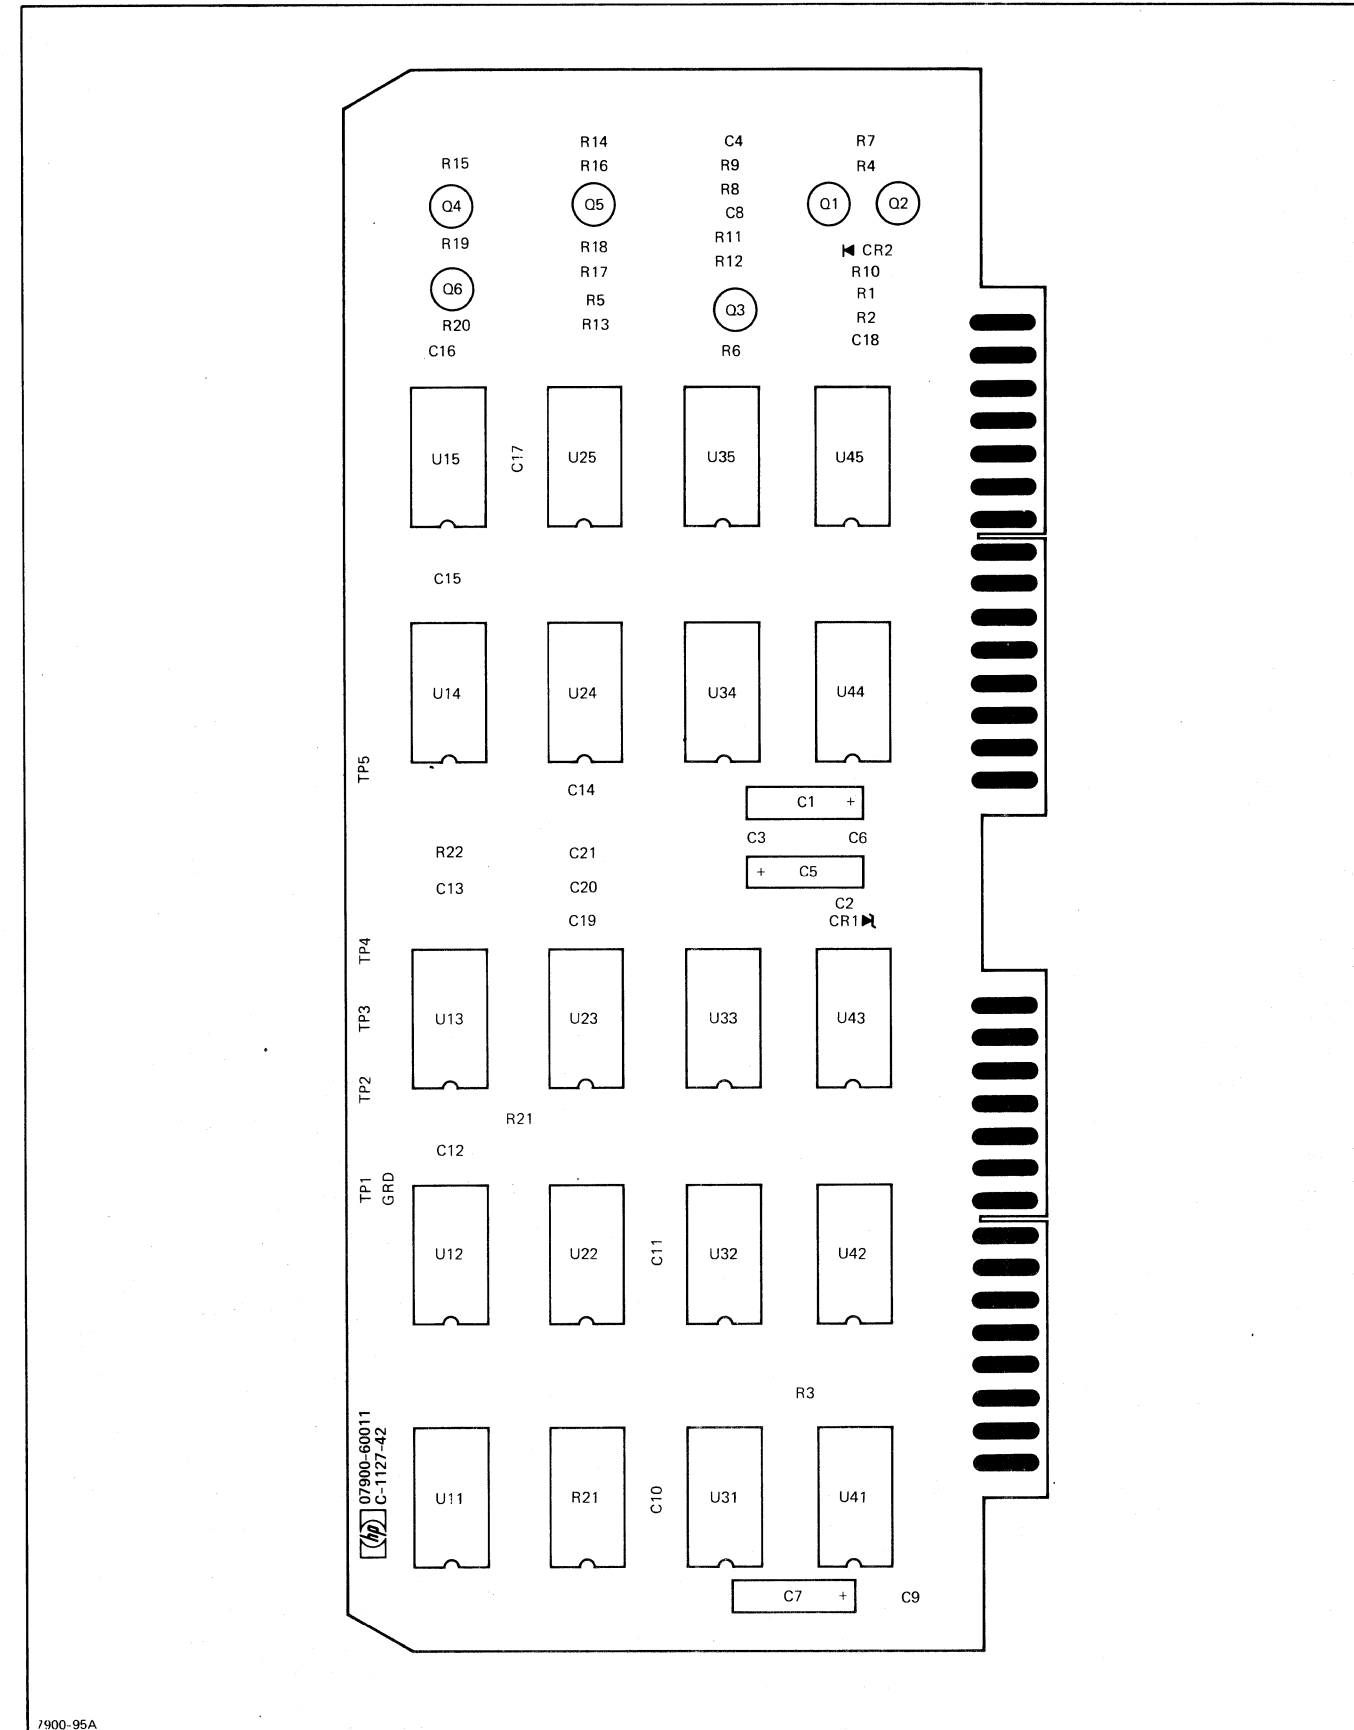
Read/Write Control and Interlock Assembly A10 Parts Location Diagram
